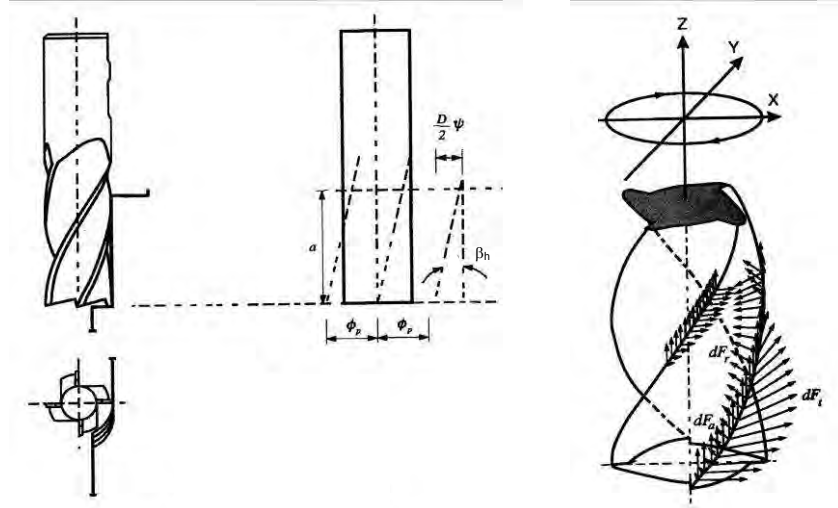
Cutter geometry of a helical end mill⁹⁸
